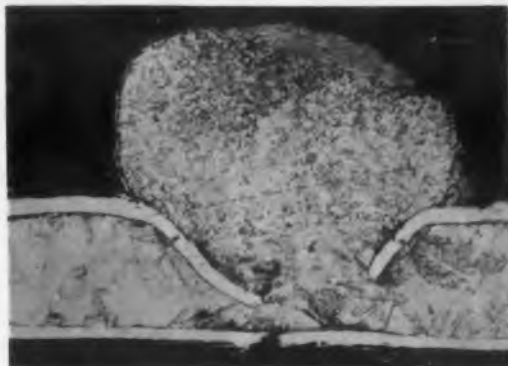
Weld showing where clad is broken through at interface.
